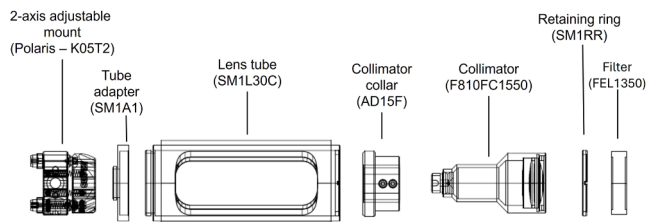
An exploded view of the optical head components. Thorlabs Inc. component part numbers are indicated.
